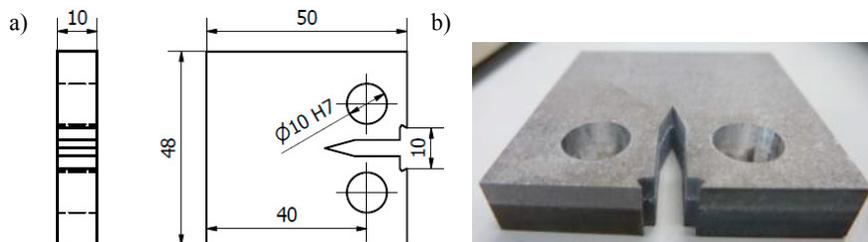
AA2519-AA1050-Ti6Al4V layered material: a) dimensions, b) layers configuration in the CT specimen.
